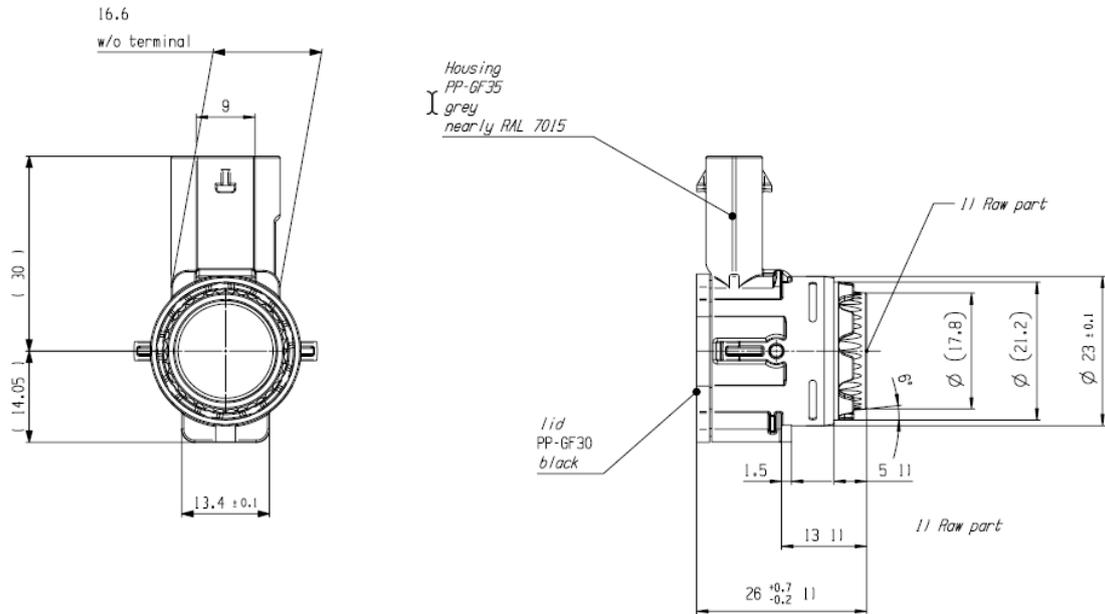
Sensor dimensions with radial connector (taken from drawing)
